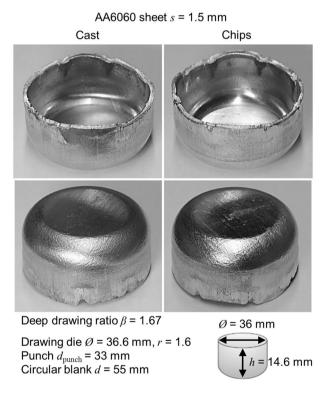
Results of deep drawing experiments of soft annealed sheets s = 1.5 mm sheets for a deep drawing ratio  $\beta = 1.67$
